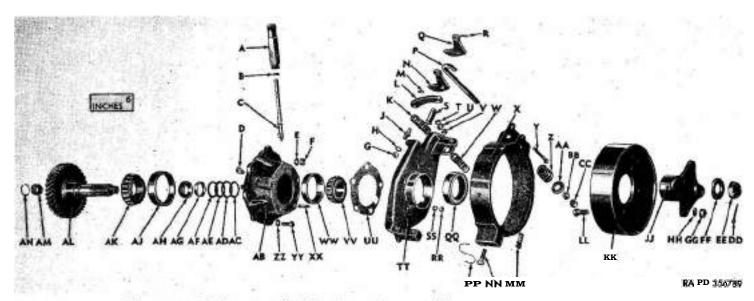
Brake output shaft bearing retainer assembly and hand brake—exploded view.
